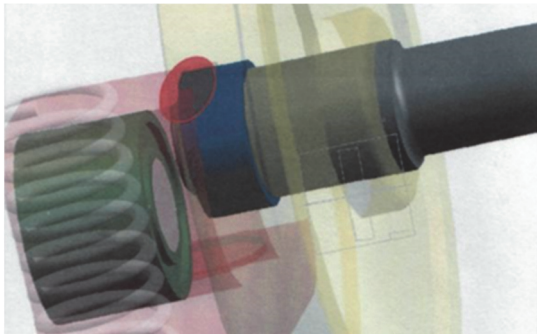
Hot deformation zone of housing, sealing ring and shaft end
